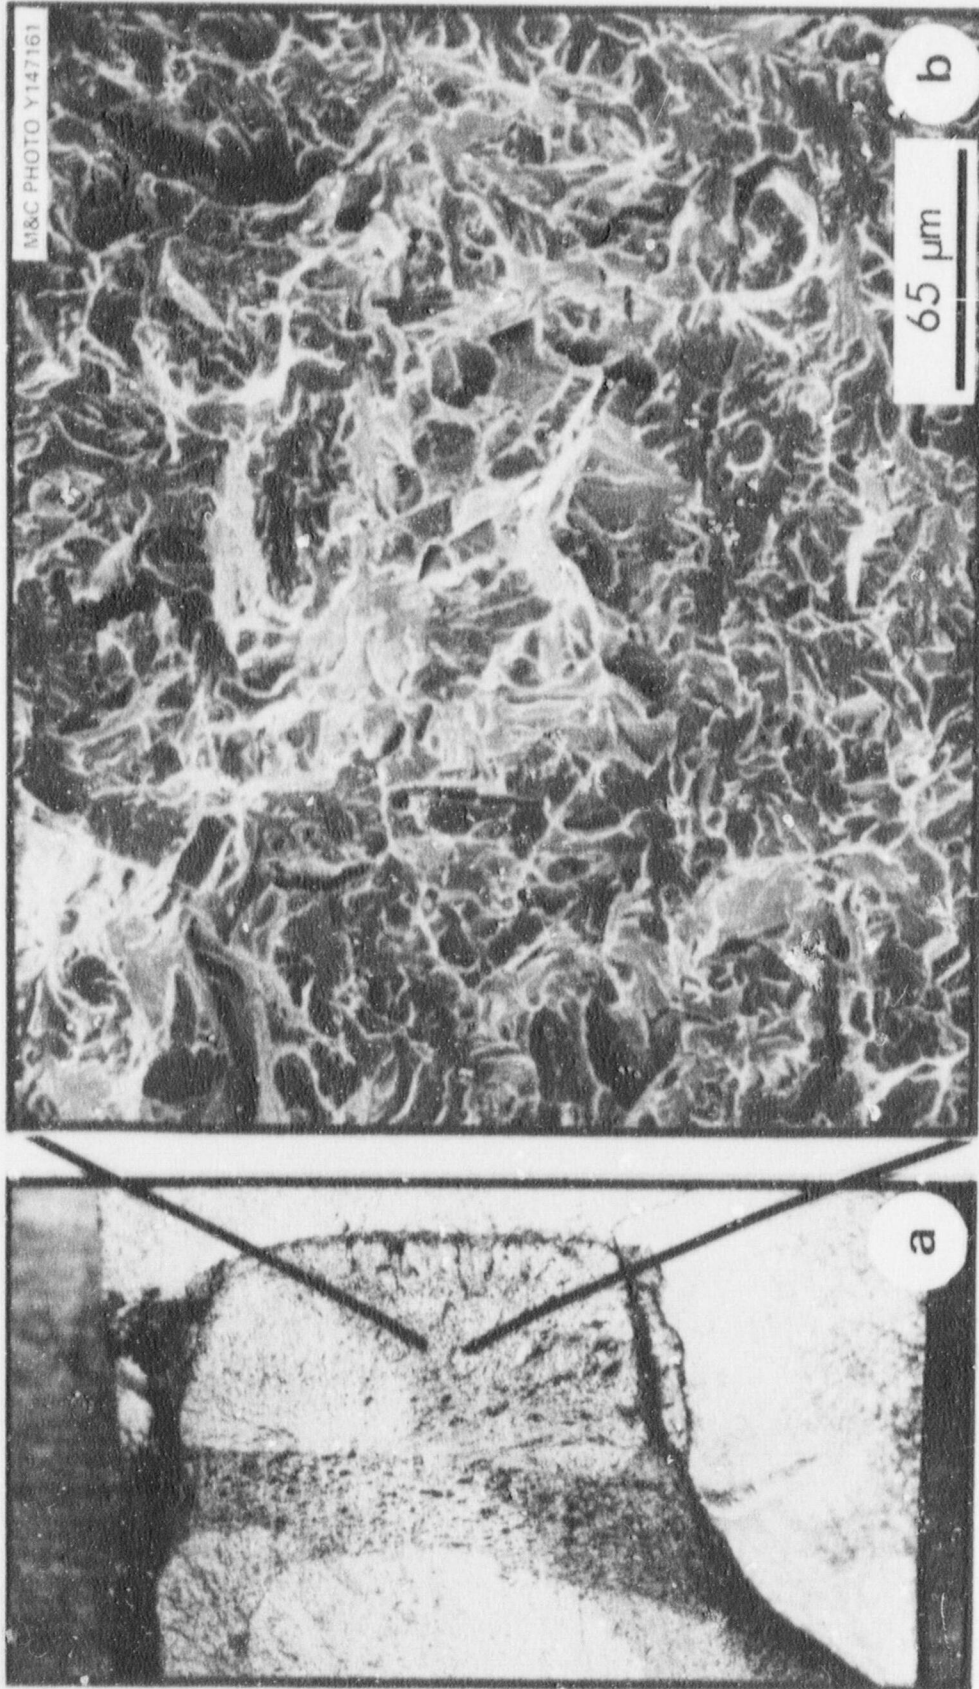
Scanning electron micrograph of the fracture in the electron-beam (EB) weld near the crack terminus. The fracture mode in the EB weld was cleavage. (a) Photomicrograph of the fracture surface (i.e., section c of Fig. 46); (b) Scanning electron micrograph of typical cleavage fracture in the EB weld. (Original reduced 14%)
